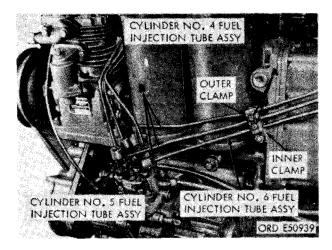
DISCONNECTING OR CON-NECTING CYLINDER NO. 4, 5, AND 6 FUEL INJECTION TUBES.
